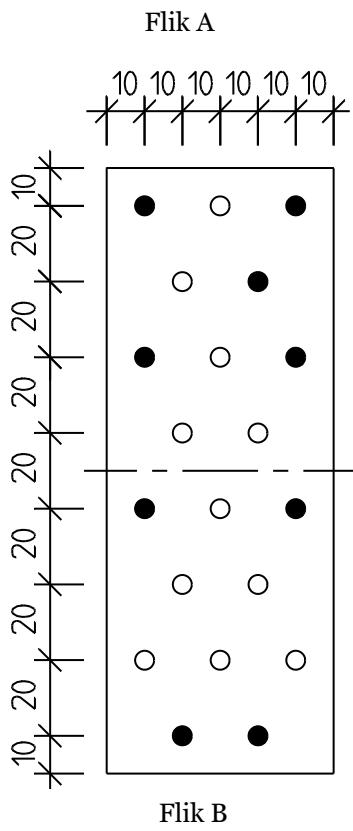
Dimensions of Angle Bracket 5528860 and 5588060
